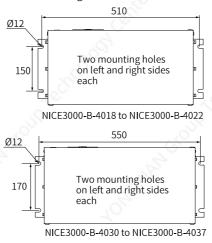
Locations and dimensions of the mounting holes of the floor-mounted control cabinet (Unit: mm)
